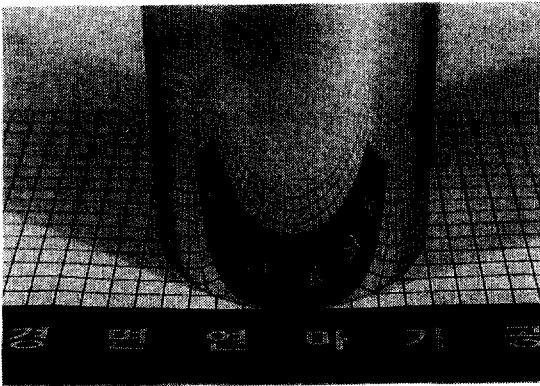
Mirror surface of the chrome coated cylindrical workpiece(Ra 0.0009μm)
